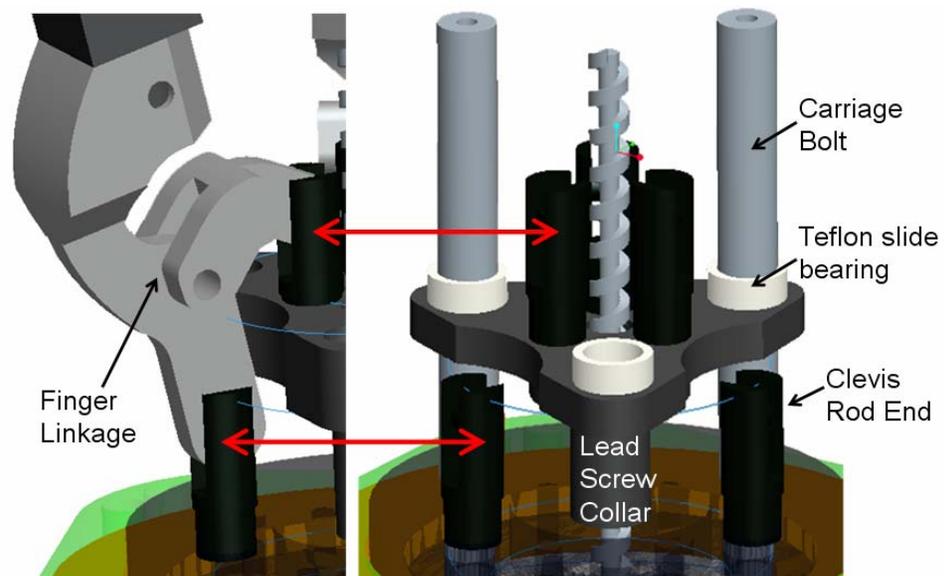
Lead screw collar assembly and finger linkages attached to Clevis rod ends.
